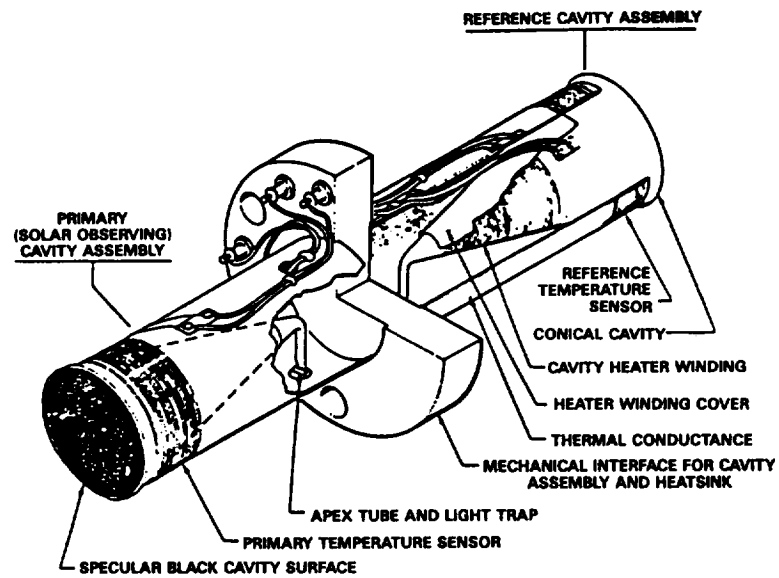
ACRIM II ACR Type V Cavity Assembly
